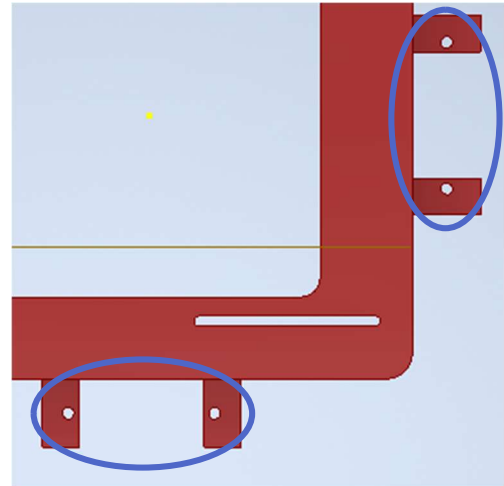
Side view of magazine and mechanism design illustrating locations of attachment
